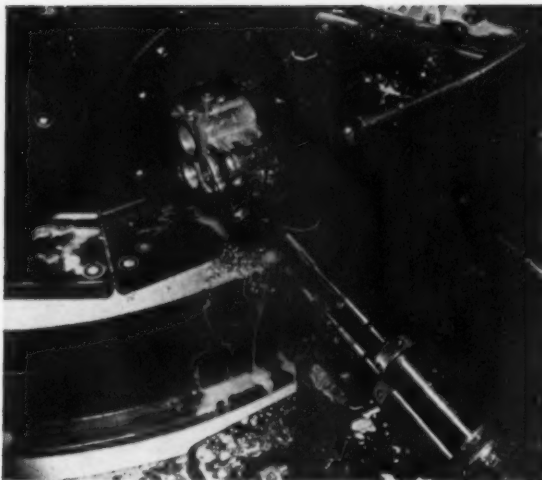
Though most tools are mounted on the main vertical slide, these machines use some side heads. At this station, two stepped taps are driven by side heads.
